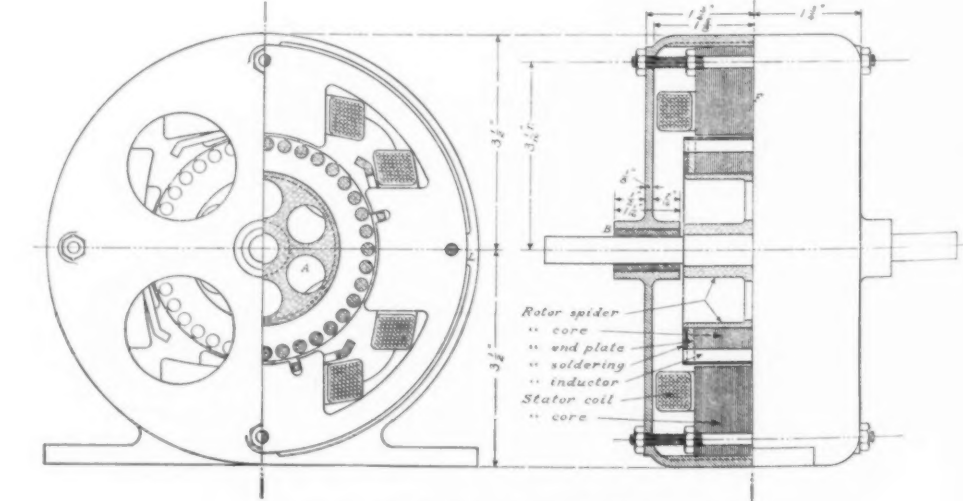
DETAILS OF COMPLETE MOTOR.
